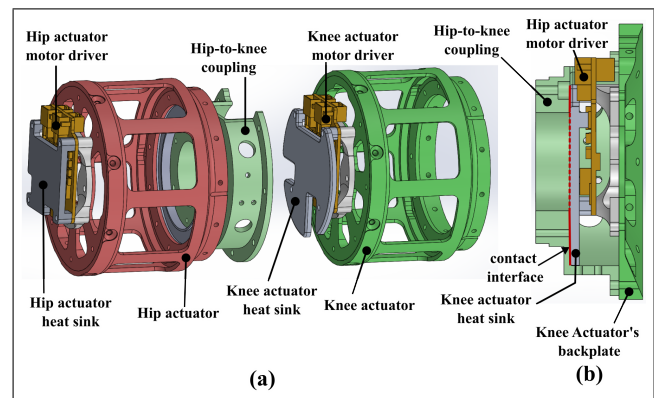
Thermal Management: (a) Exploded view: The knee heat sink goes inside the cavity of the Hip-to-knee coupling; (b) Cross-section view: The knee heat sink touches the Hip-to-knee coupling at the contact interface (red).
